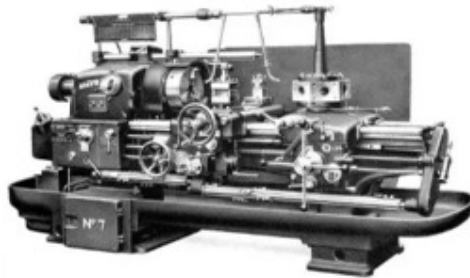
Represents Turret Lathe Machines Used in the Industry for Different Machining Processes [17].
